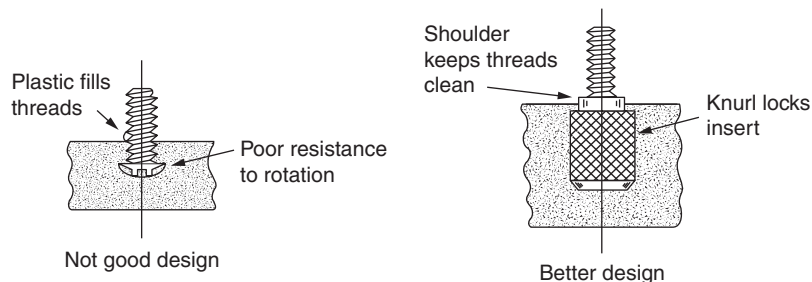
Rod-type inserts are generally restricted to injection or transfer moulding. The rod insert may be anchored by notching, bending, swaging, grooving, etc.
